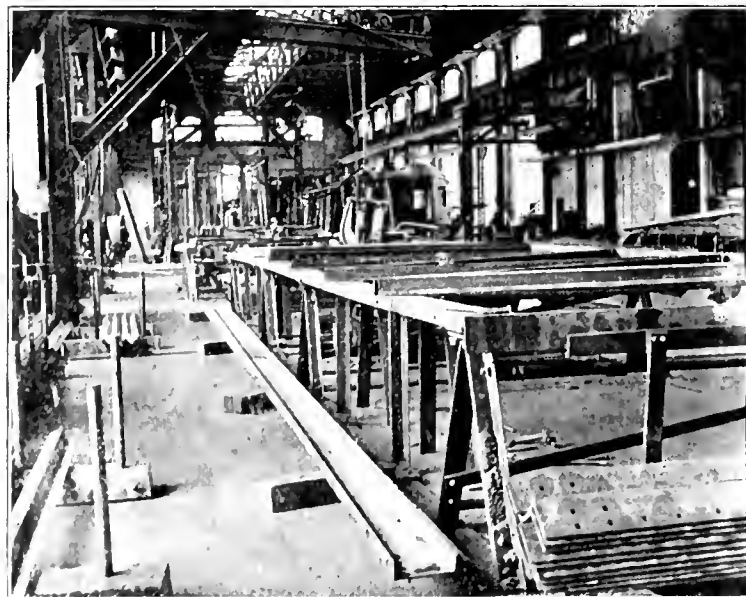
Assembling Steel Freight Car Side and End Frames.
